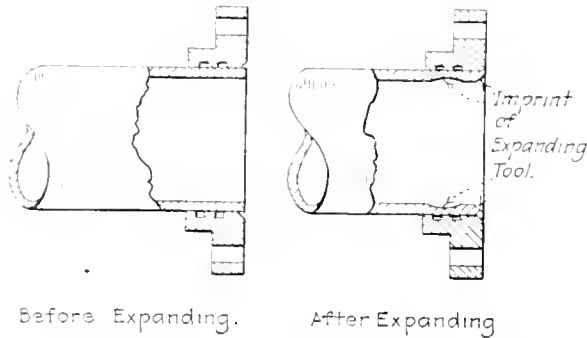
METHOD OF EXPANDING PIPE INTO FLANGE
